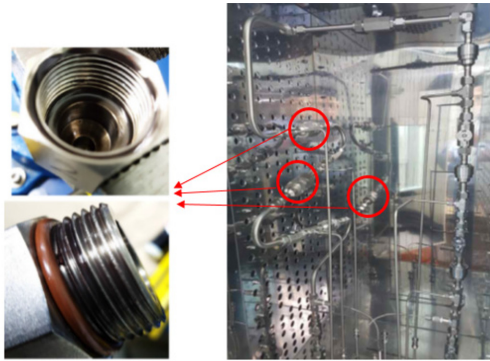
O-ring assembled fitting and fuel flow rig tester.
